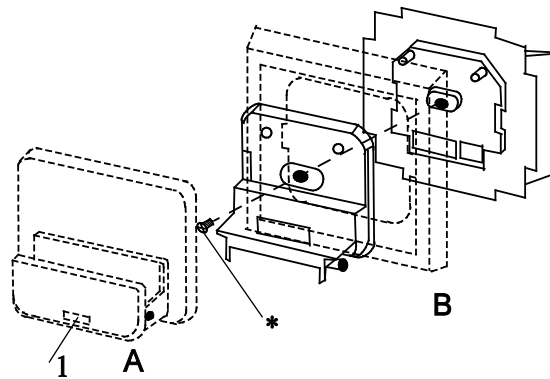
8218 U + 8254-xxx (A) + 2511-XXX / 1721-xxx (B)
